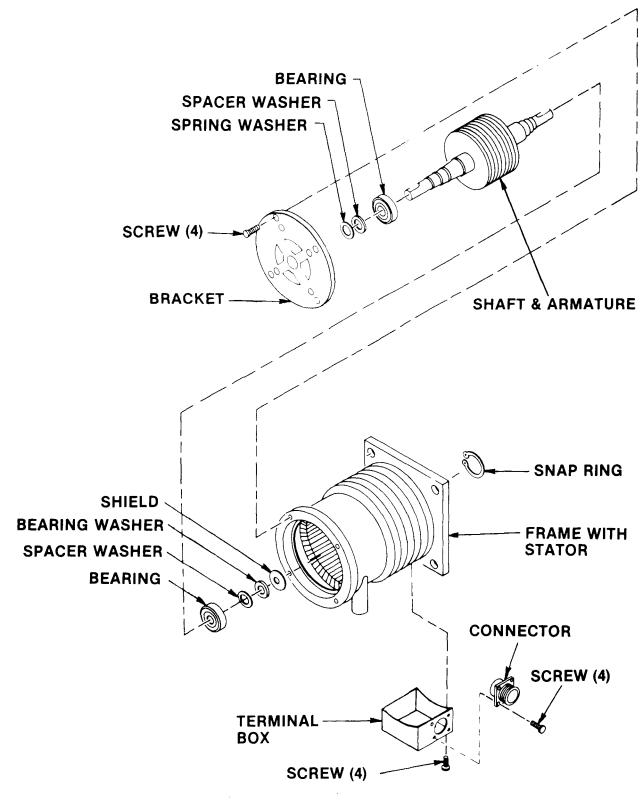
Evaporator and Condenser Fan Motor (For Model 3770 Only)
